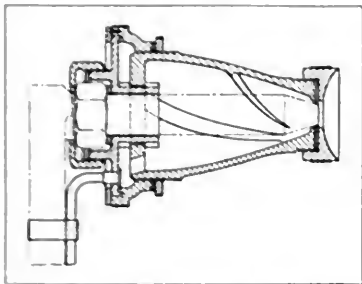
BLOW PIPE FOR OXYACETYLENE WELDING AND CUTTING UNDER WATER
